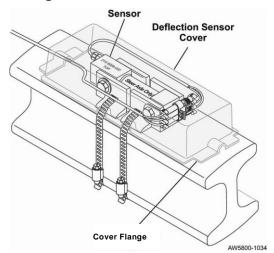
Placing the Cover Over the Deflection Sensor Assembly
